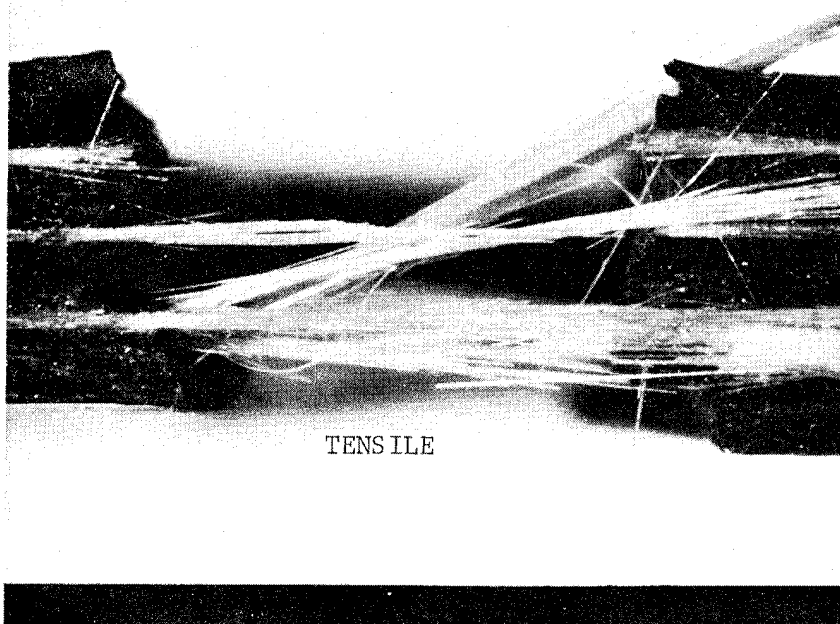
18X EDGE-VIEW OF IMPACT FRACTURE AREA OF
